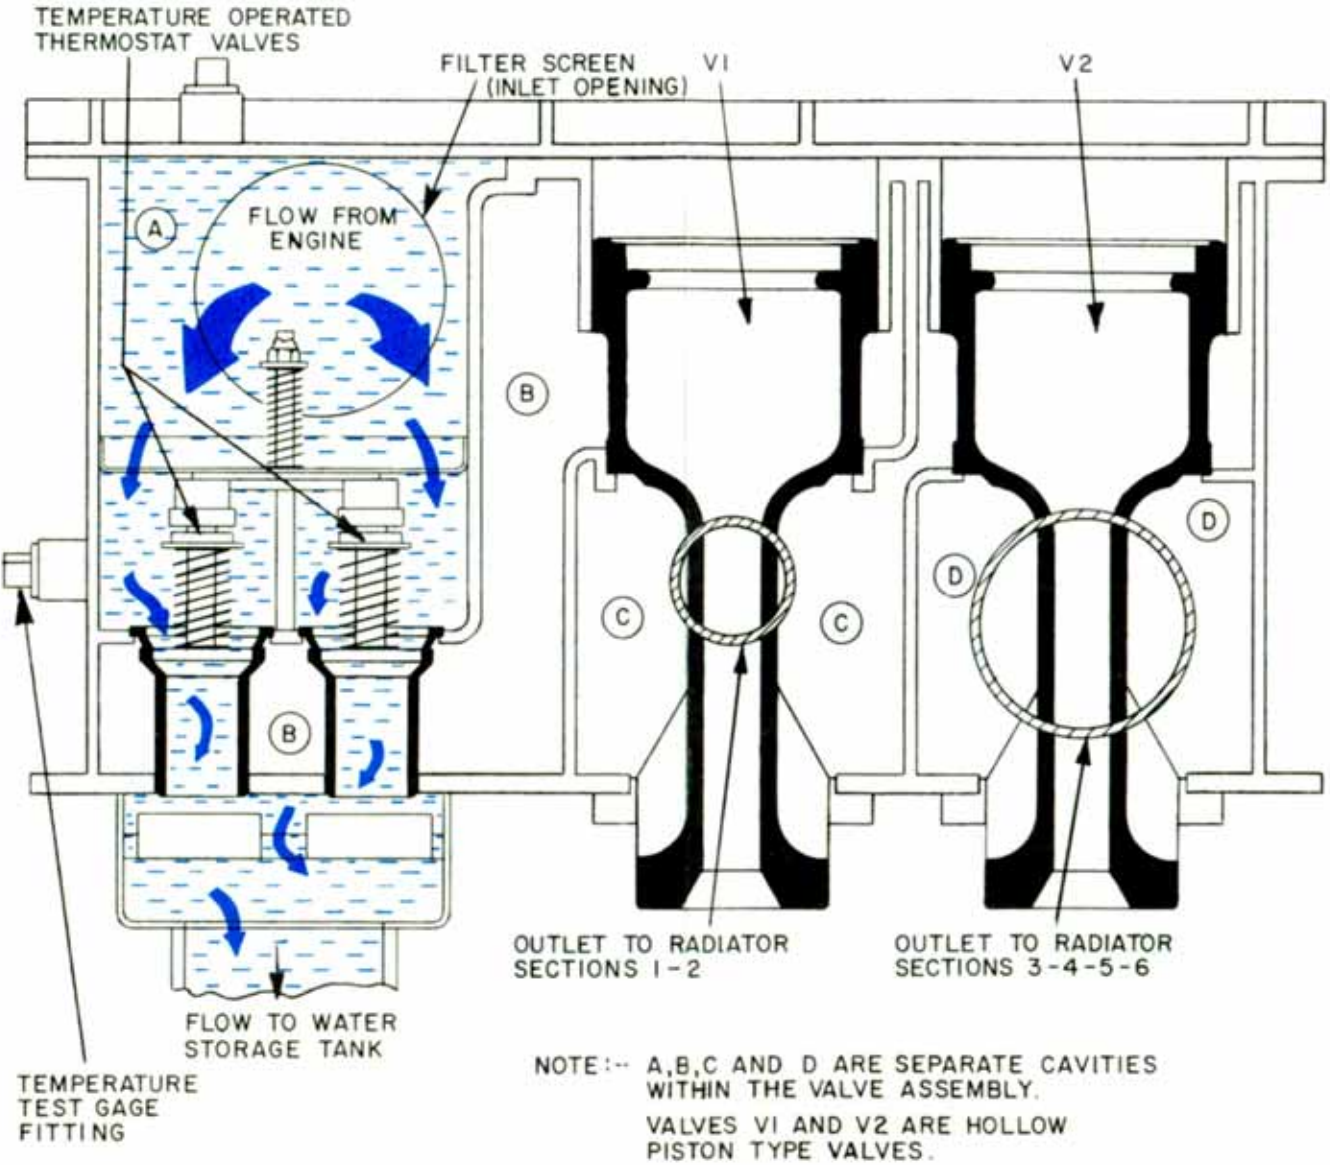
Flow control valve operation, minimum engine cooling required
